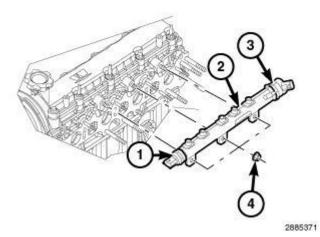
Fuel Rail Pressure Sensor, Fuel Rail, Pressure Solenoid & Nuts Courtesy of CHRYSLER LLC
